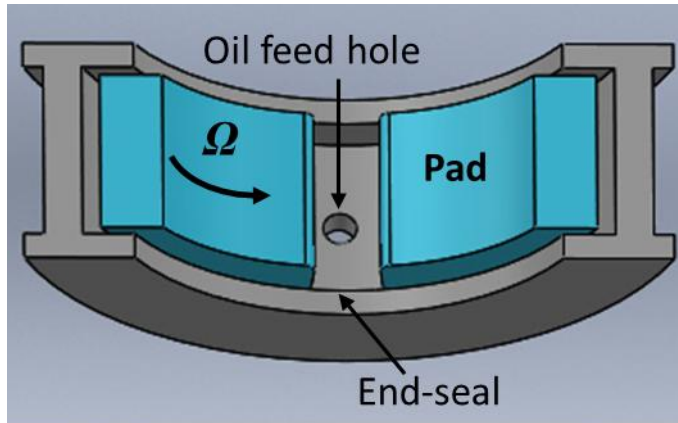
Schematic view of half journal bearing with oil supply hole and end seals.
